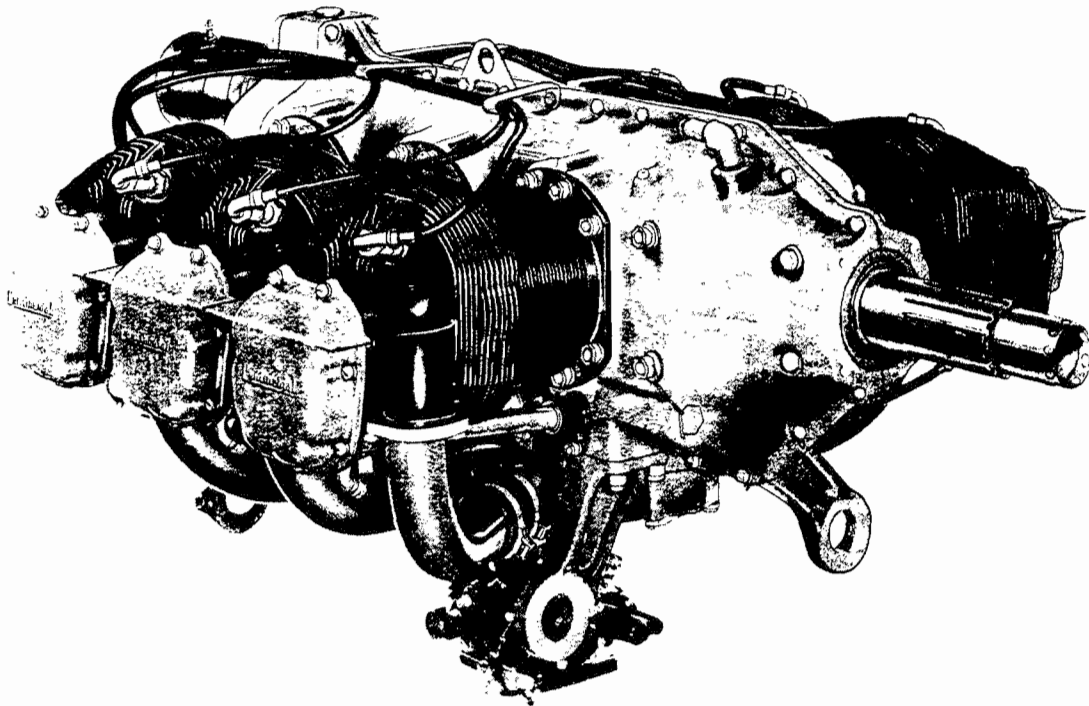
THREE-QUARTER RIGHT FRONT VIEW TYPICAL OF MODELS E185-8, E185-11 AND E225-8.
